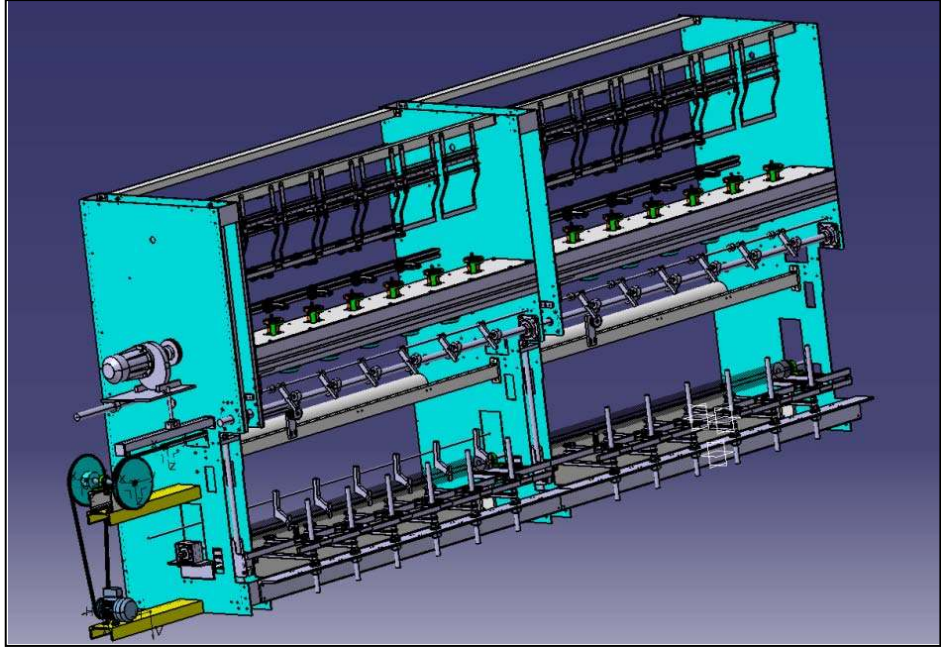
General views of machine and other parts assembled on it. Drawing is done by Catia.
